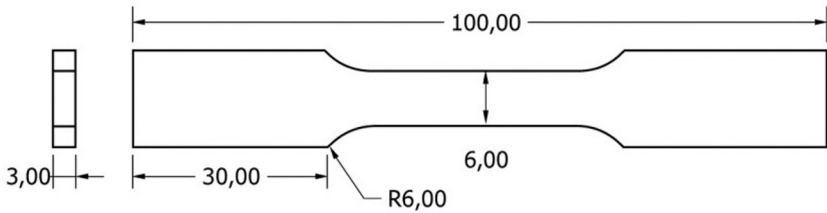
Tensile Specimen Dimensions (ASTM E8 standard)
